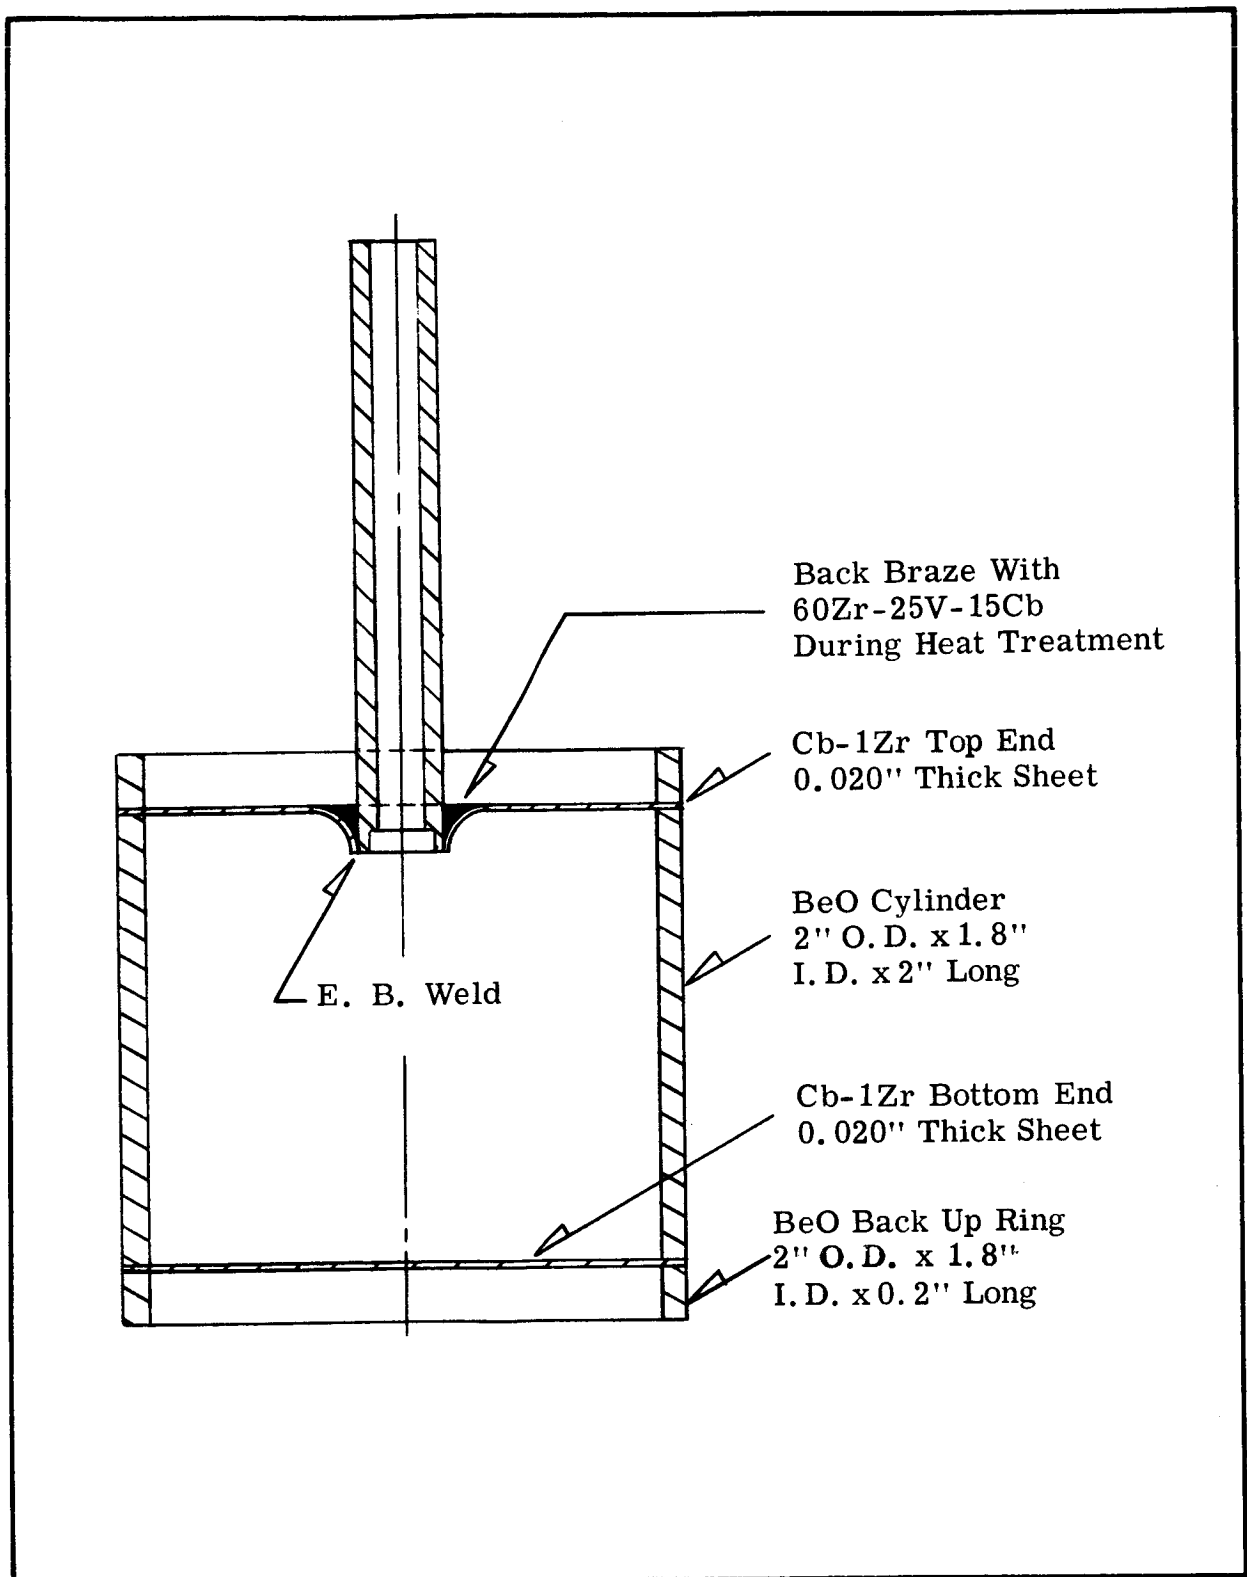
Schematic of Two Inch Ceramic-to-Metal Seal Used In the High Temperature Mechanical and Vacuum Tests.
